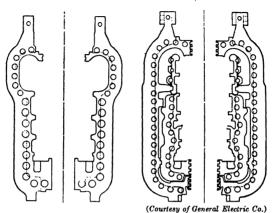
Comparable bolting flange of single- and double-shell turbines.
